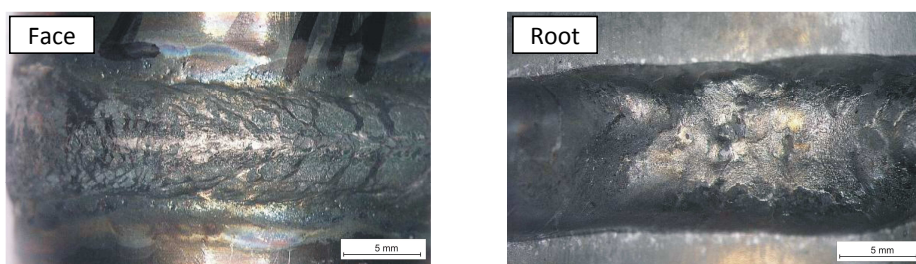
Face and root of a fusion weld made with the hybrid technique, of a tube made of DMV 617 mod alloy.
